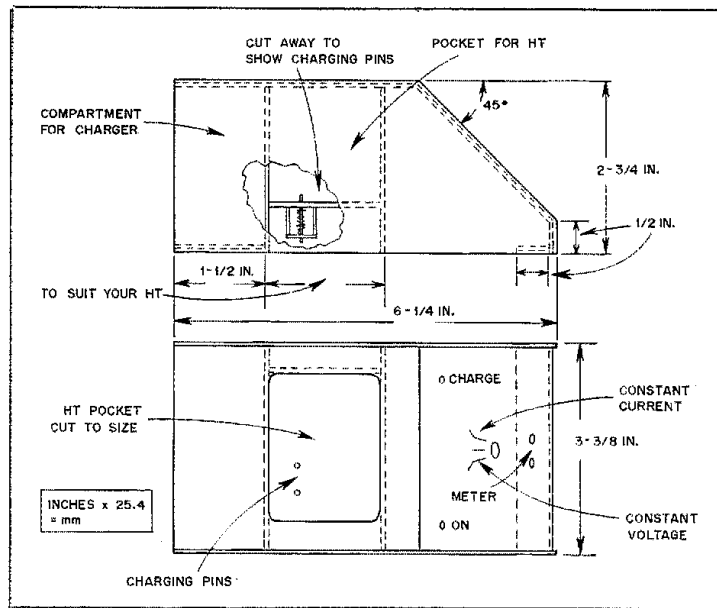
An attractive enclosure for the charging circuit can be fabricated with printed circuit-board material. Patterns for making the cabinet are shown above. The cut-away portion shows a spring-loaded pin used for connecting power to the transceiver battery circuit.
